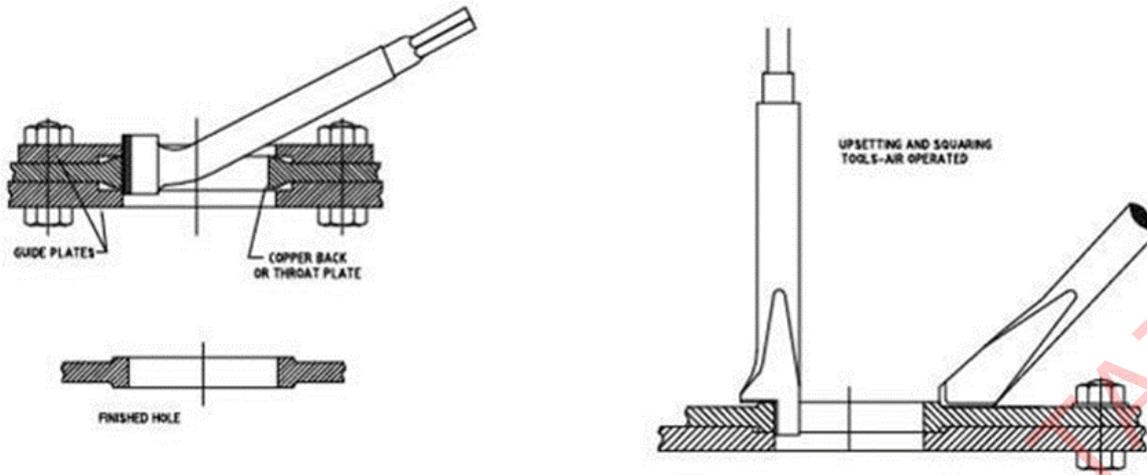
Forming bossed holes for arch tube bushes in firebox plates
